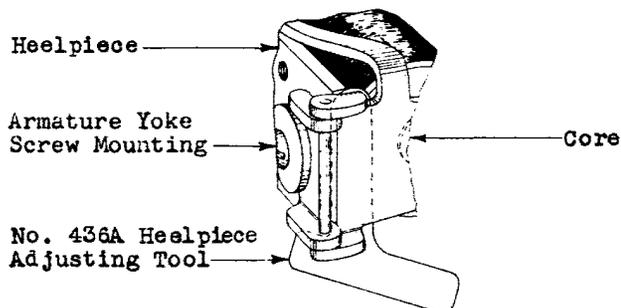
Fig. Z – Adjusting the Heelpiece Airgap With the No. 436A Heelpiece Adjusting Tool Inserted From the Armature Side (all except 251- and 252-type relays)
